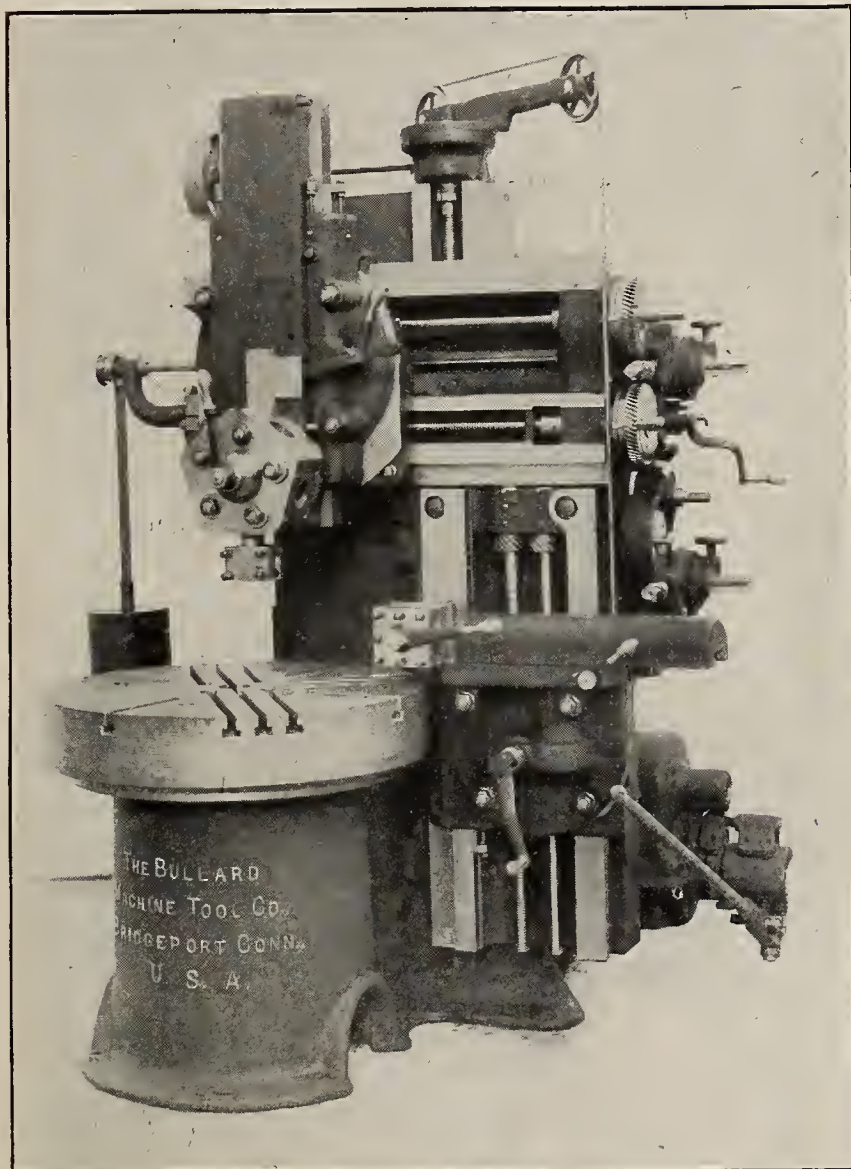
FRONT VIEW BULLARD MACHINE TOOL CO.'S VERTICAL TURRET LATHE.
